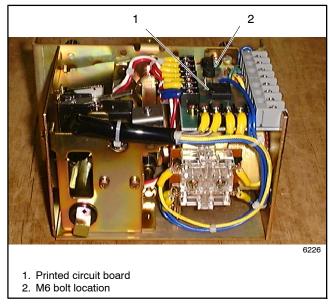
Printed Circuit Board and M6 Bolt (for closing coil)
